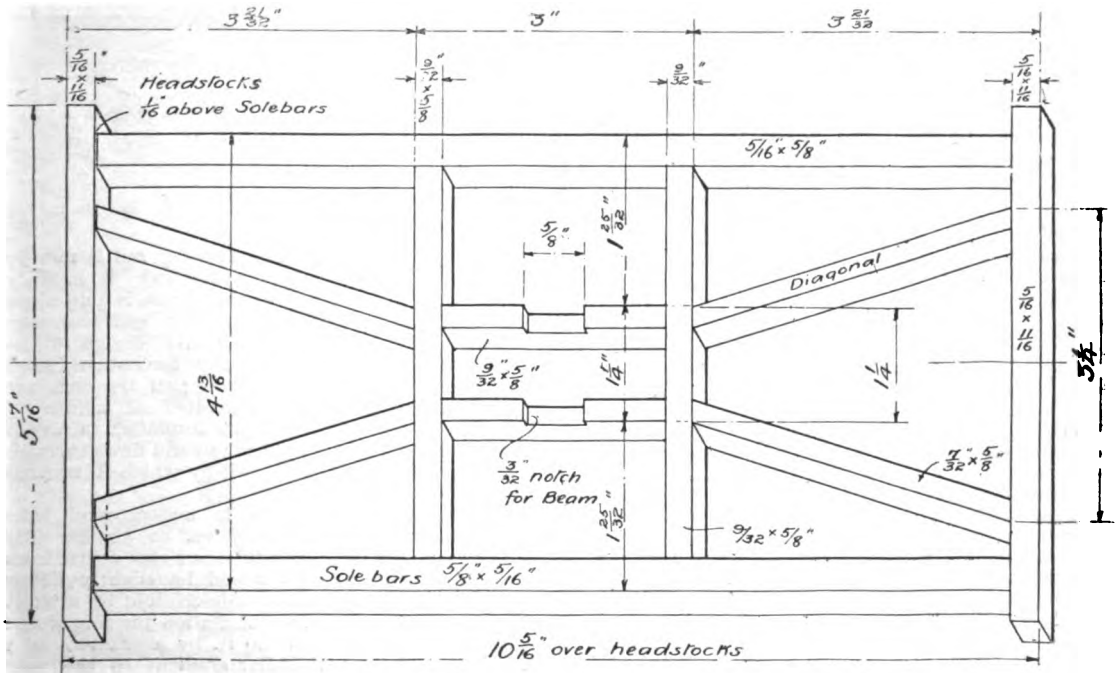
PLAN OF UNDER-FRAME. (Half size for 1-16th-in. scale model.)
